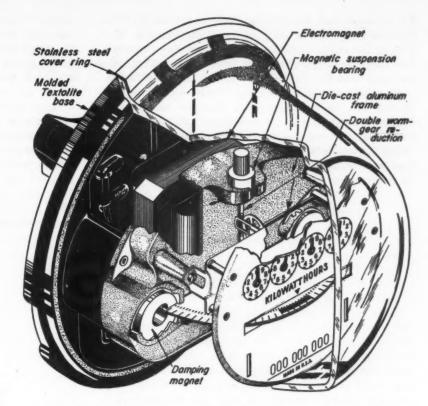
Cutaway view of new watthour meter shows design features such as magnetic-suspension bearing and cast-in damping magnets
